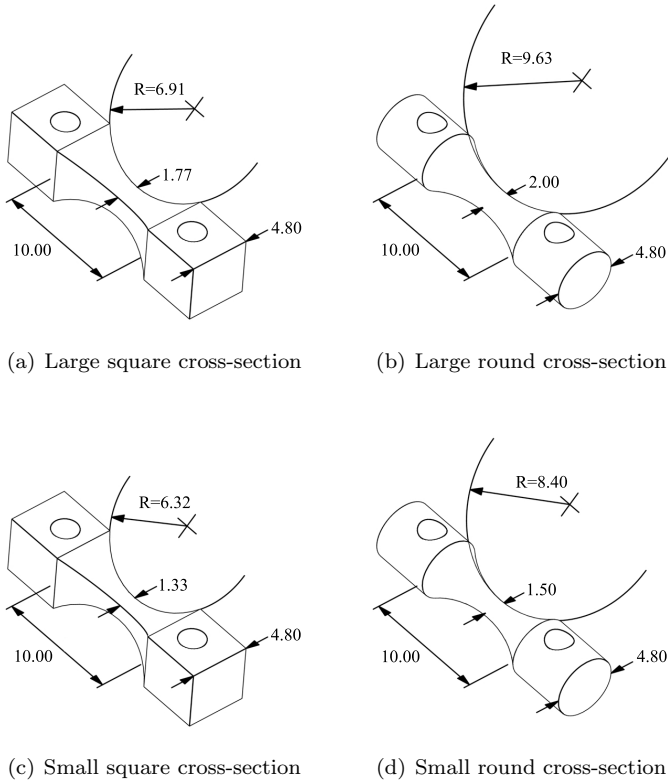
Single beam geometries; Dimensions in [mm]
